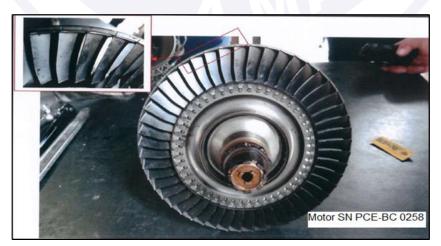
Rear view of the power turbine rotor, highlighting the rubbing marks.
